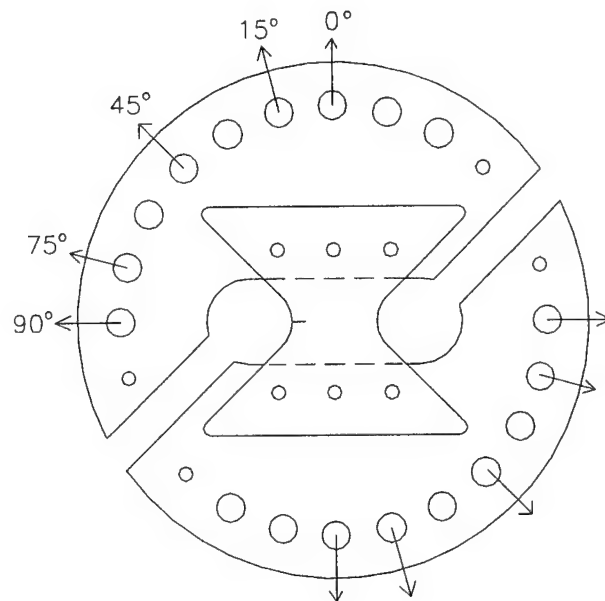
A Schematic of the ARCAN Test Fixture and Specimen Containing a Single-Edge Crack.
